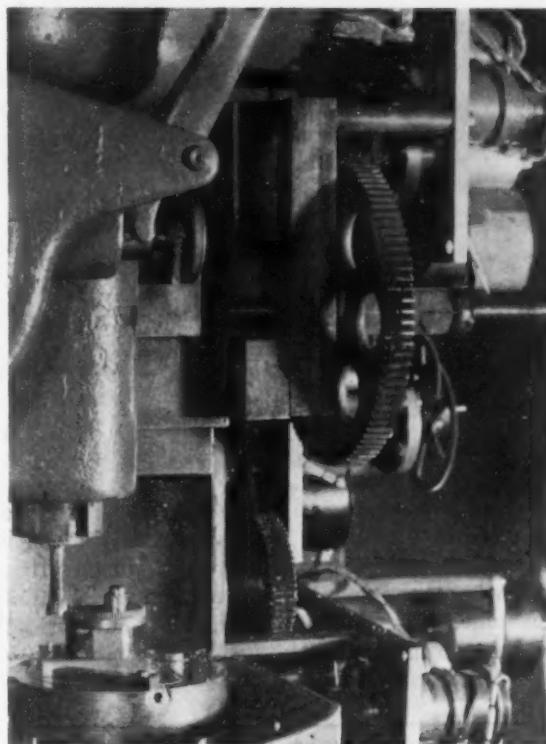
Close-up view of the machine shows cutter, work and gearing arrangements. Cutter control rotation synchro and cutter control gearing are at lower center.
